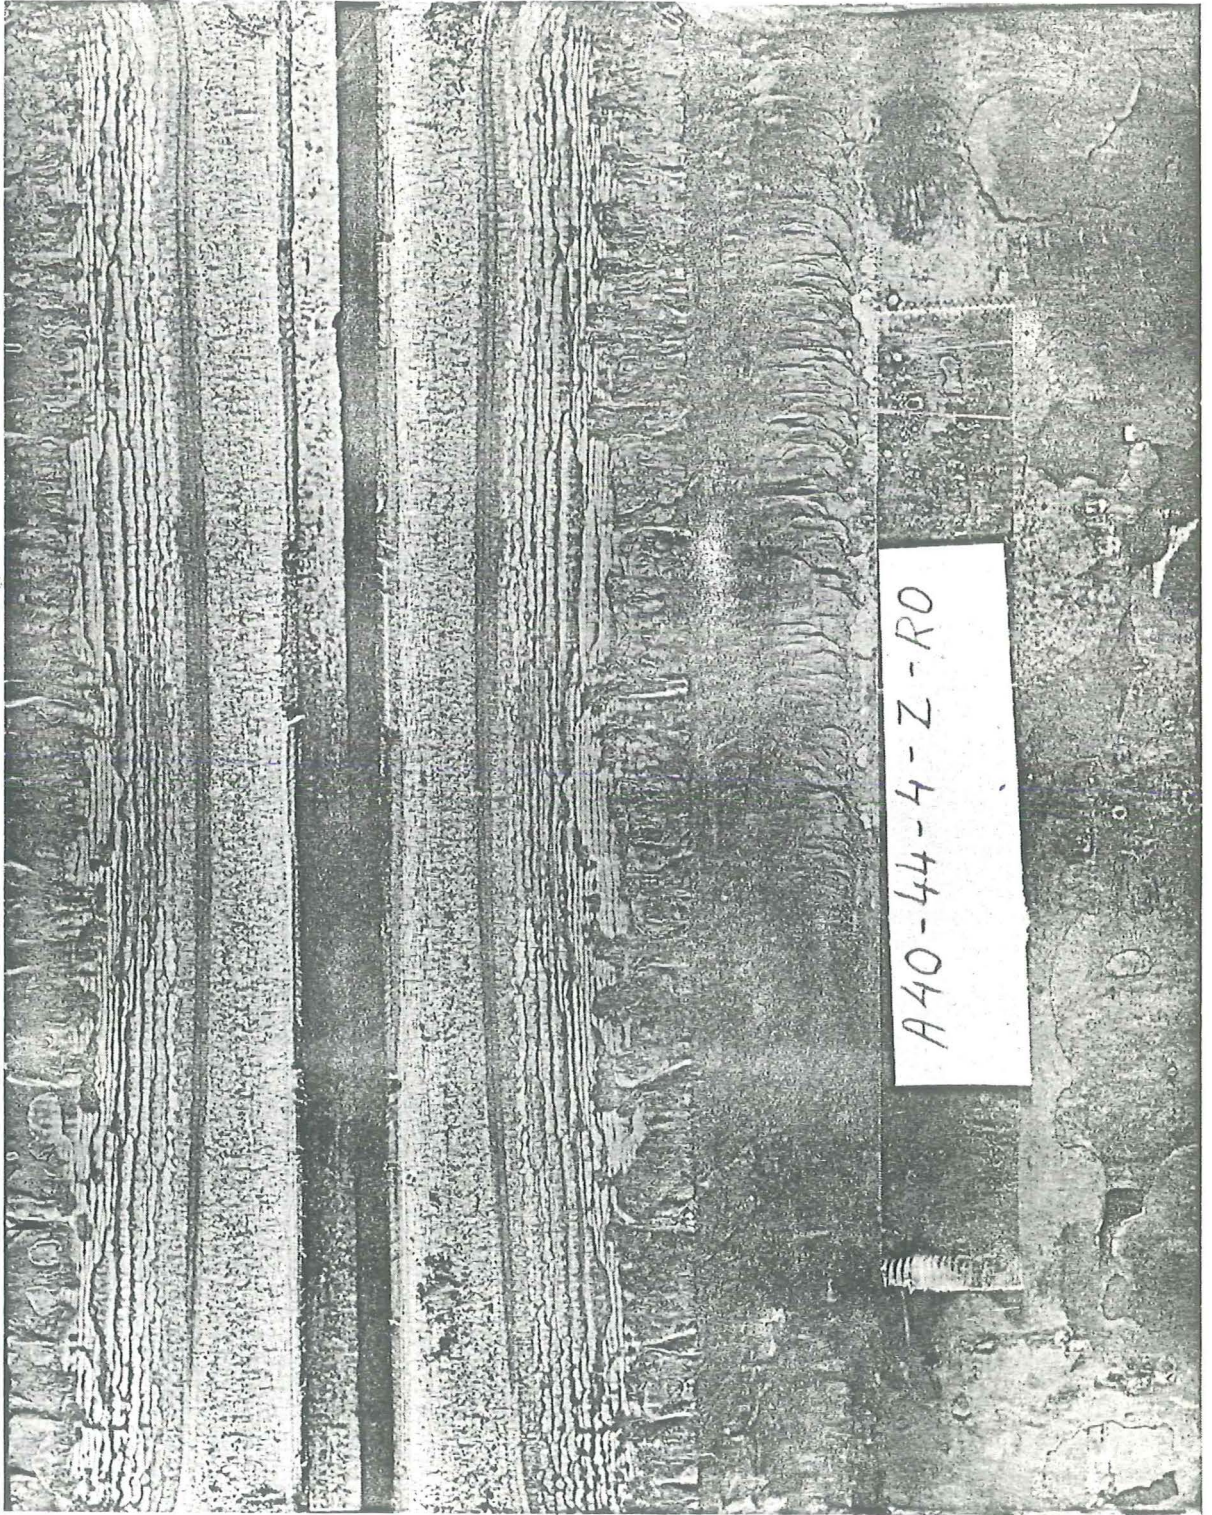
Fracture surface, test in seawater
